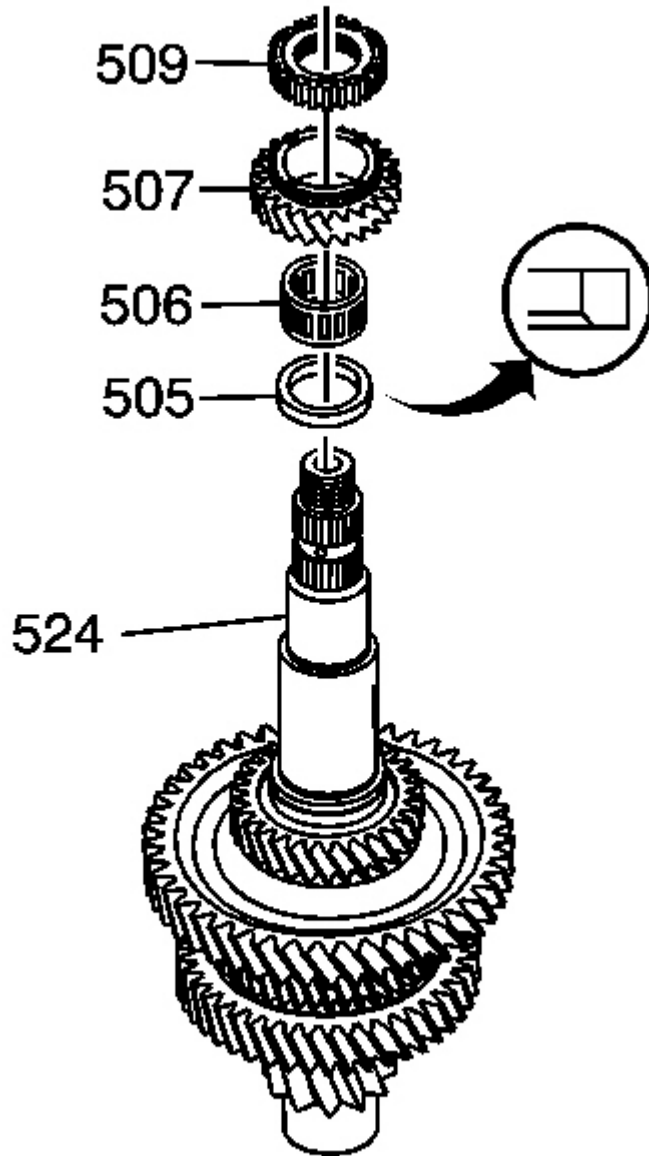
5th Driven Gear Output Shaft & Components Removed
